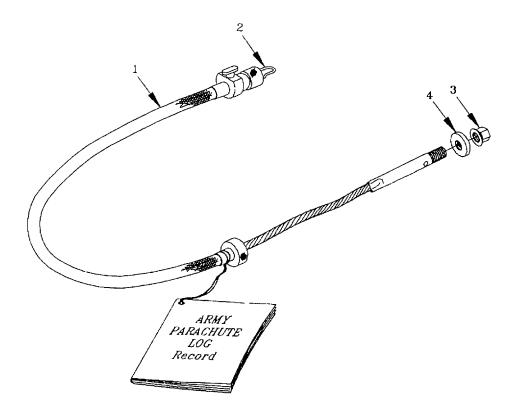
LINE, EQUIPMENT LOWERING, 8FOOT
